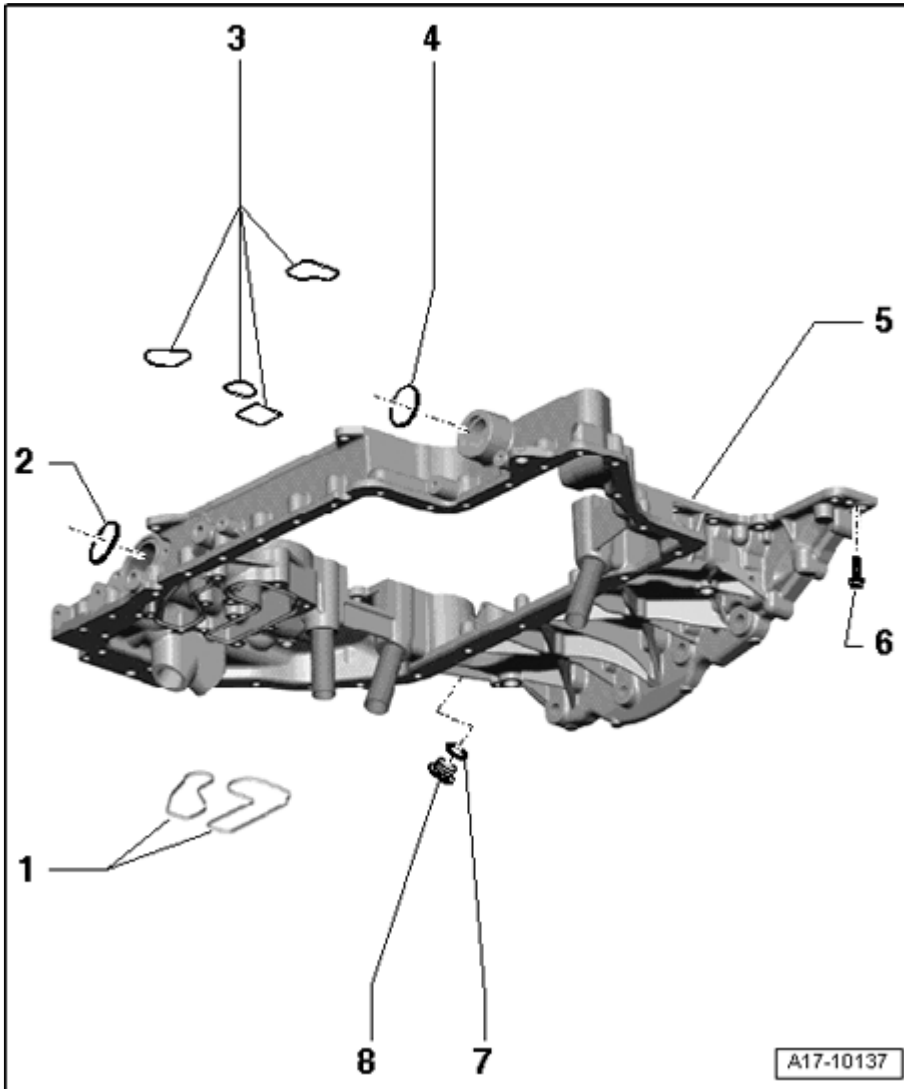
Upper Part Of Oil Pan, Assembly Overview
